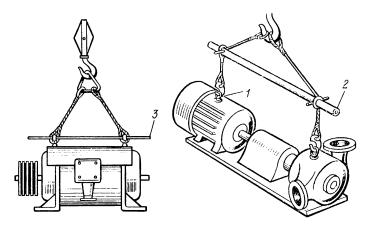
Slinging the machines 1—eye-bolt; 2—lifting beam; 3—crow-bar
